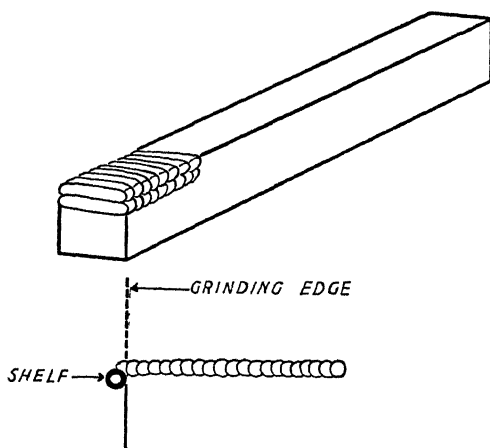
Diagrammatic sketch illustrating how tool is made by arc welding.
